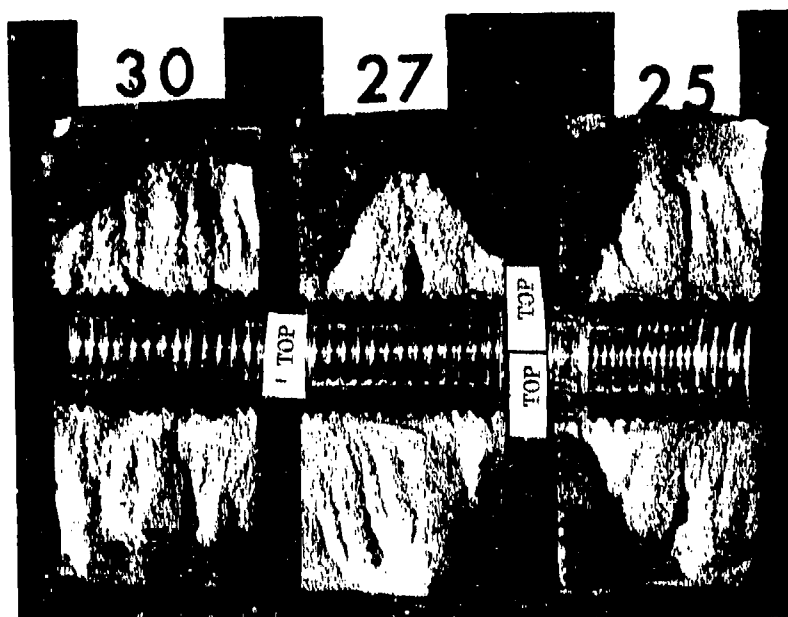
Close-up of Fatigue Failure of Specimens with Heli-Coil, Tridair, and Kaynar 1/4-28 Size Inserts. Inserts Installed by AFML. No Bolt in Inserts.
